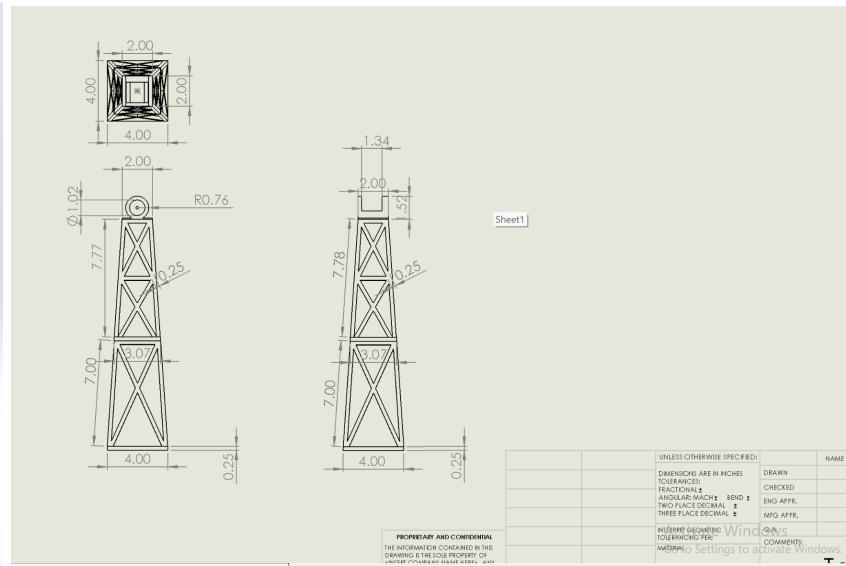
2D Drawing of Final Tower Design, Final Volume of 16.97 in<sup>3</sup>.
